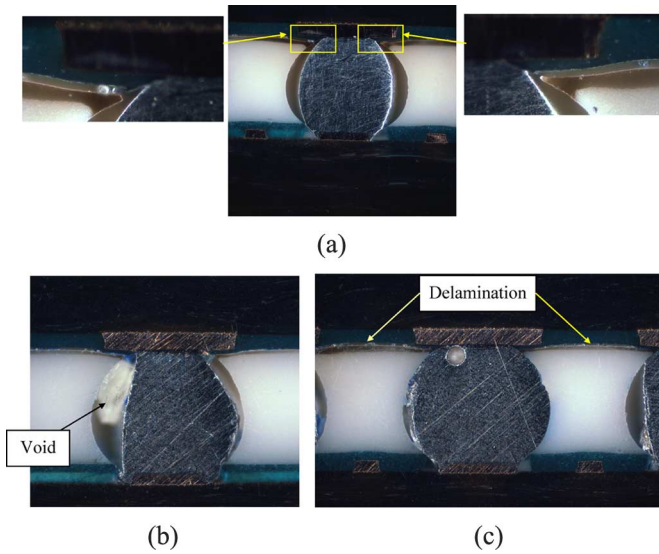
Cross-sectional images of FC-CSP with UF-B. (a) F06 solder ball. (b) H01 solder ball. (c) H03 solder ball.
